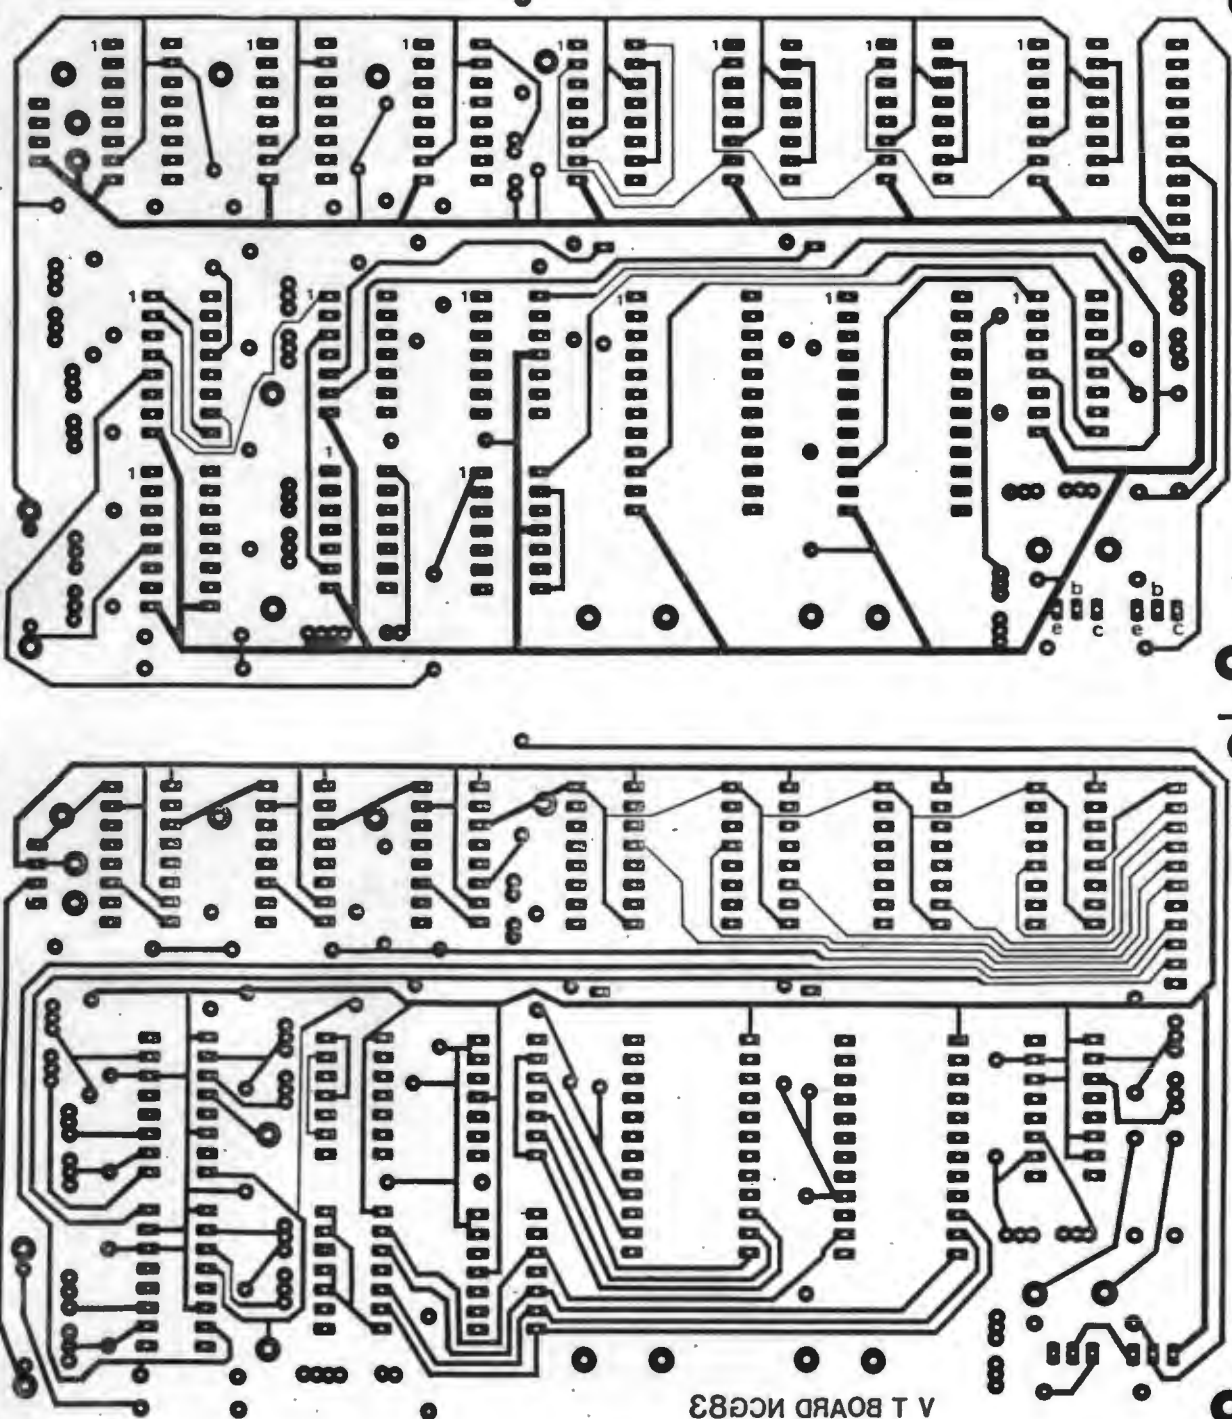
CIRCUIT MASK AND COMPONENT LAYOUT OF THE VALVE TRIGGER BOARD.
